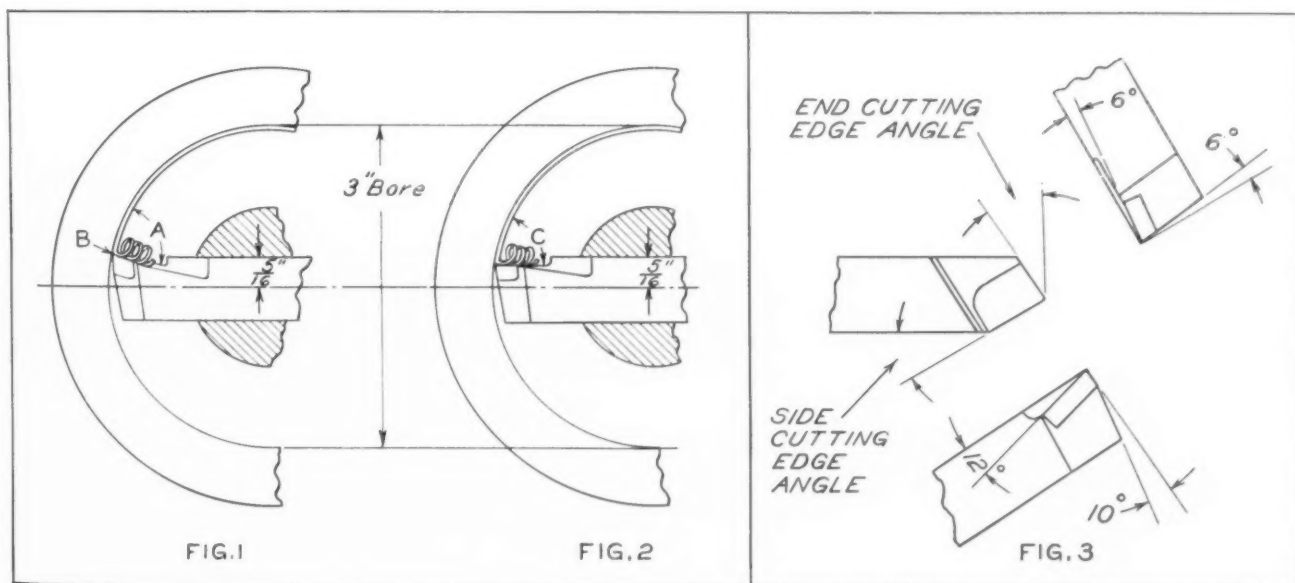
Carbide-tipped Boring Bit Designed to Eliminate Excessive Negative Top Rake, as Shown by the Compromise Positive Back Rake at A, the Zero Front Clearance Angle Giving a Firm Support to Cutting Edge at B. Fig. 2. Regular Carbide Turning Bit as it Appears when Used for Boring. A 5/8-inch Boring Bit in a 2-inch Bar would be 5/16 Inch above Center, Creating a 16-degree Negative Top Rake C if Used in Boring a 3-inch Hole, which would be too much. Fig. 3. Boring Tool with 30-degree Side-clearance Edge Angle and 33-degree End-clearance Edge Angle—One of the Tools Adopted as Standard
